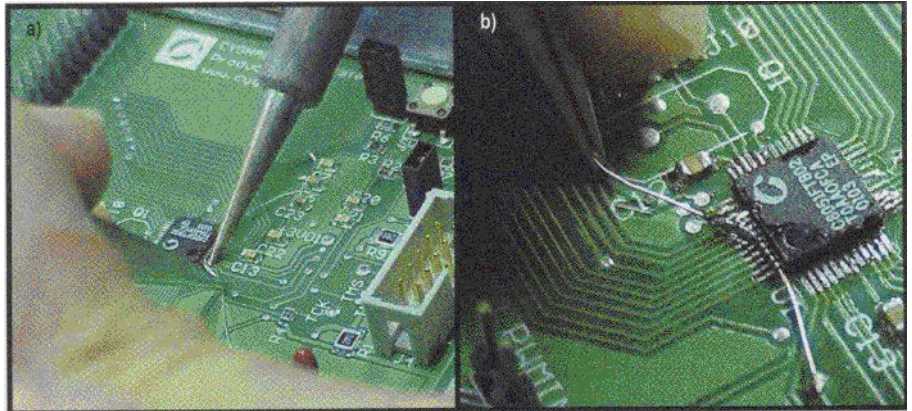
Hold the tweezers close to the device and begin heating the lead closest to the tweezers. b-Removing the device quickly can damage it because of the high heat.
